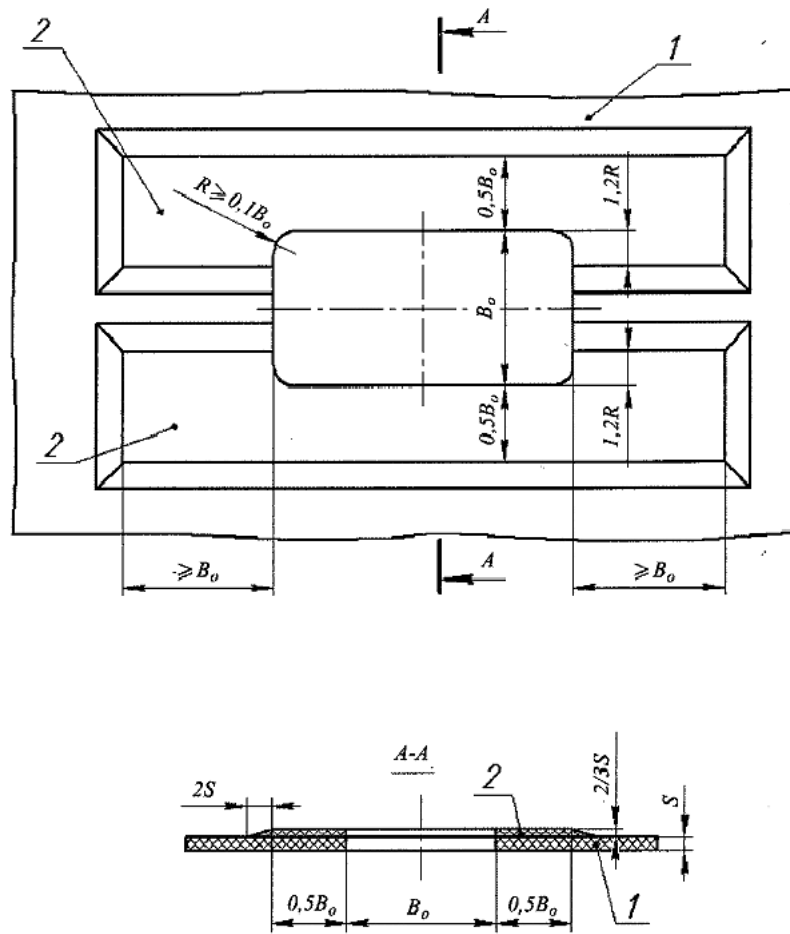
Reinforcement of a rectangular opening in a single-skin structure:
